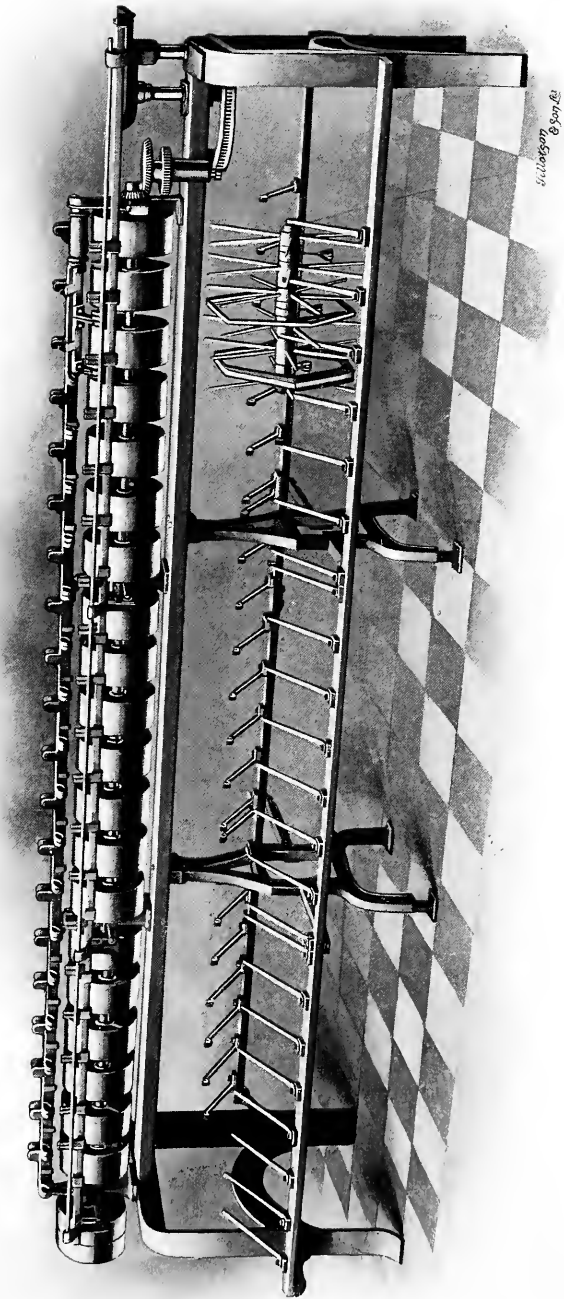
Improved single drum winding frame (latch and catch). (Made by Messrs Arundel & Co., Stockport, England.)
